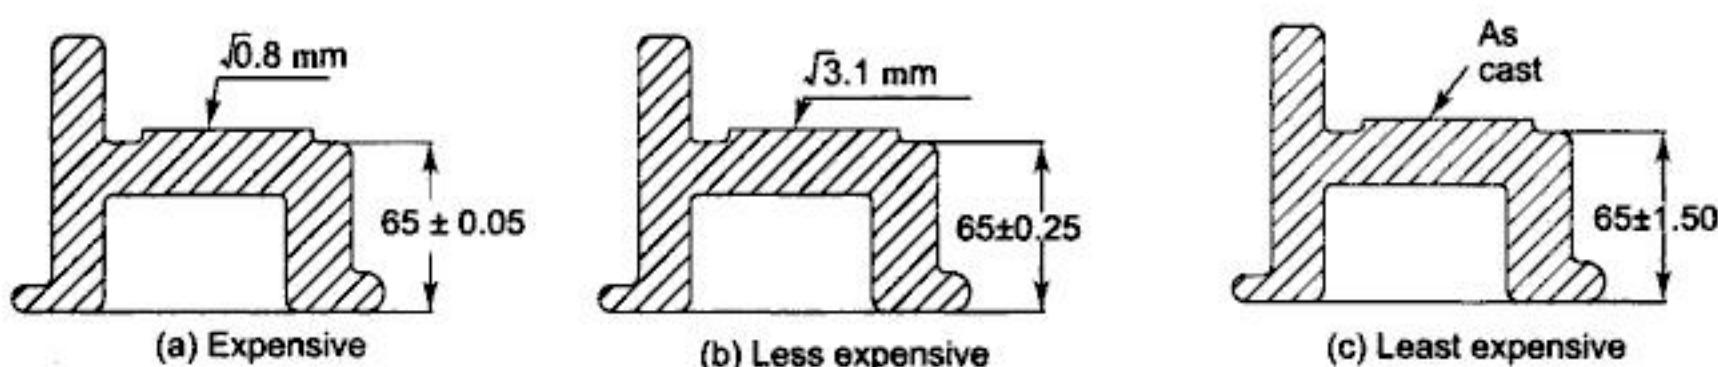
Type of tolerances and surface finishes that necessitates machining
